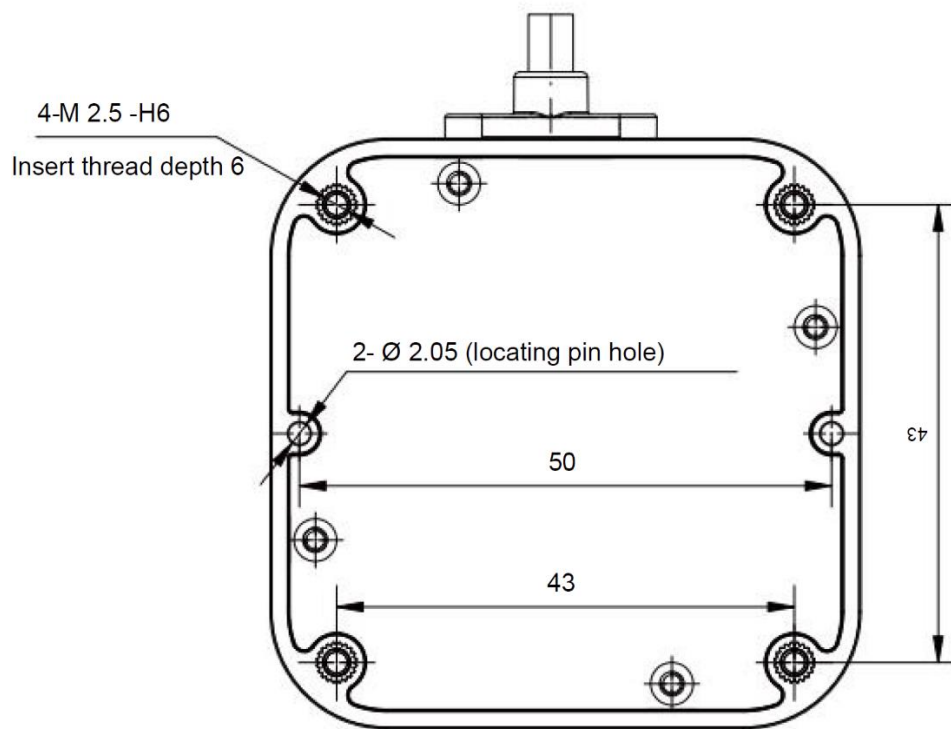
Sensor mounting dimensions of Parakeet ProE. Units (mm)
